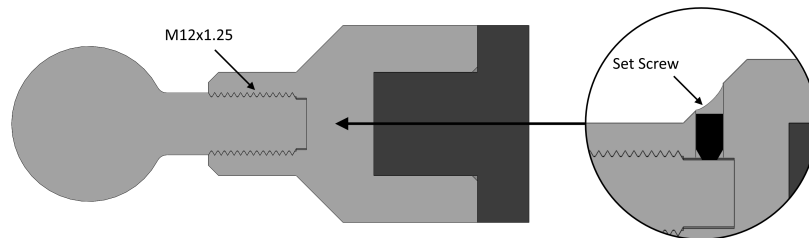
Ball joint link adapter (L), optional set screw (R)
